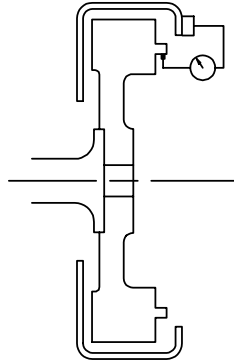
Checking Driving Ring Pilot Bore of Flywheel
